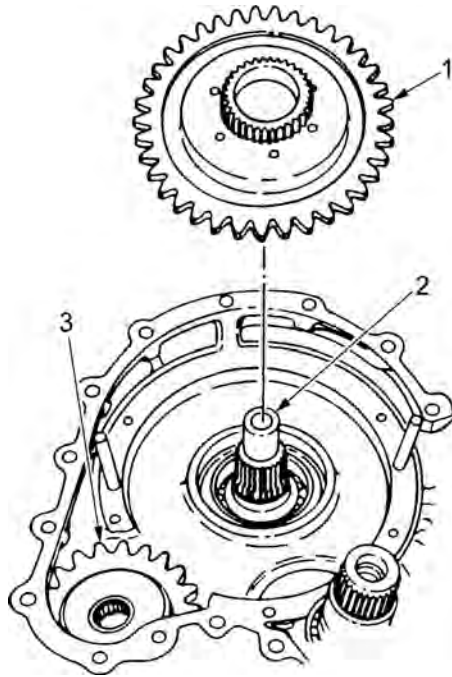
Left Steer Gear, Left Steer and Output Sun Gear, and Left Output Shaft Removal.
